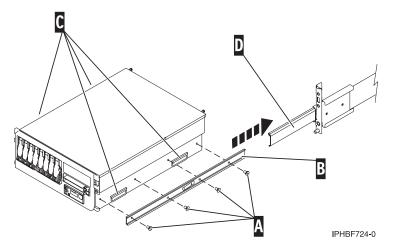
Attaching the system rails and slide the system unit onto the rail assembly.
